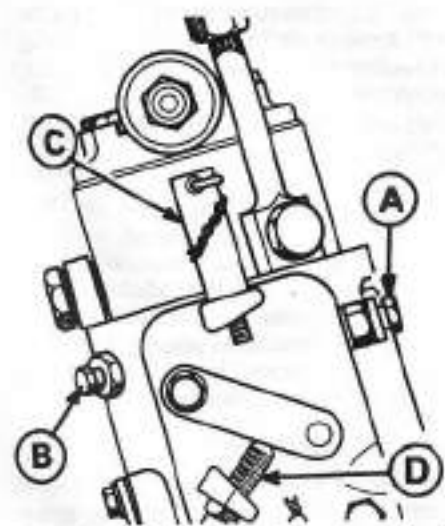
Plug (B) located on pump bleeds the high pressure side of pump while plug (A) located in governor housing bleeds governor and drive cavity. Refer to text for bleeding procedure. High idle speed screw is located at (C); low idle speed screw is (D).
